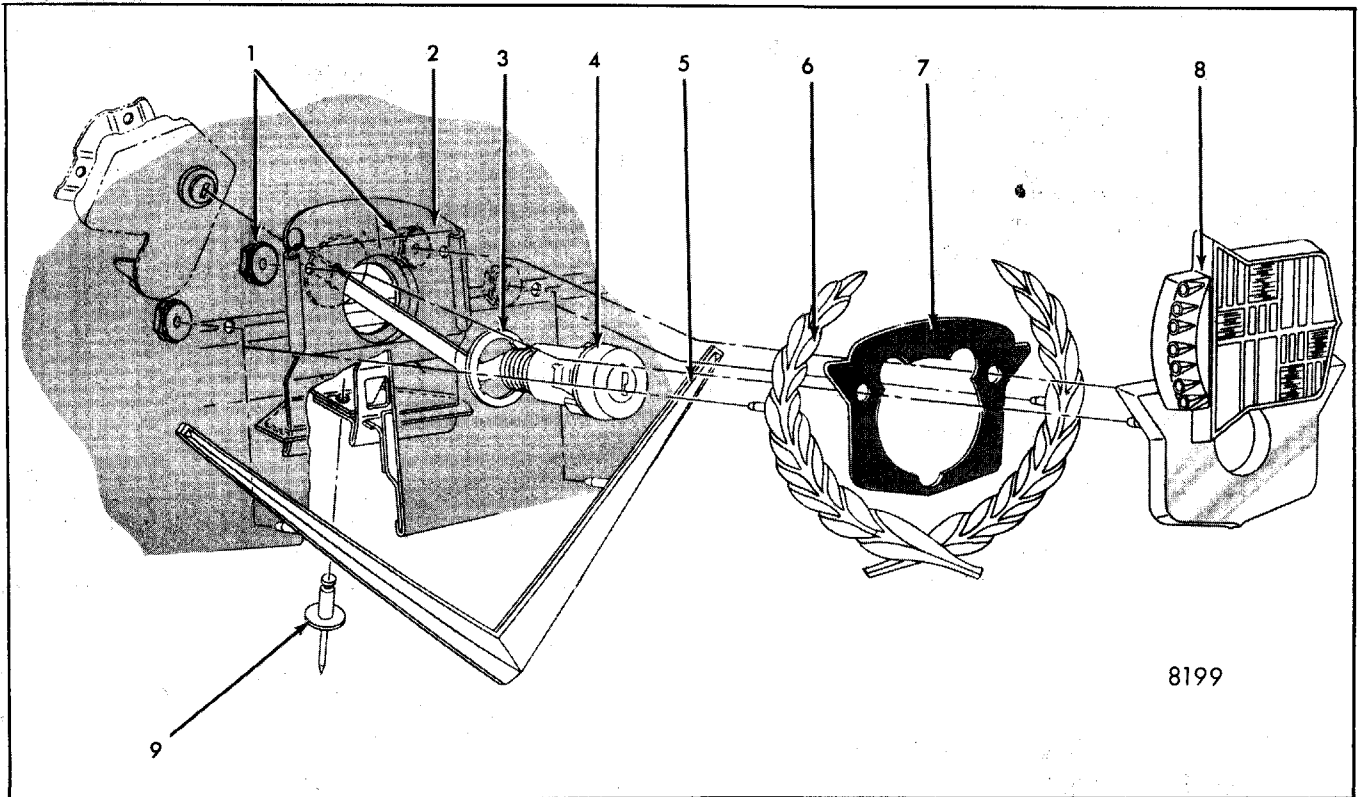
Cadillac Rear Compartment Swivel Emblem and Lock Cylinder - All Styles less "K-69"
